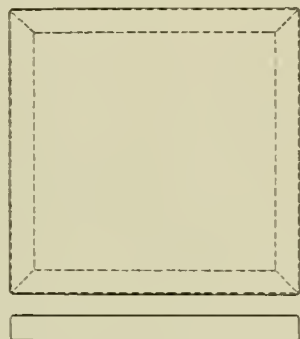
Suggested Arrangement for Holding Scraps of Block Laggings; This May Be Removed in a Unit
